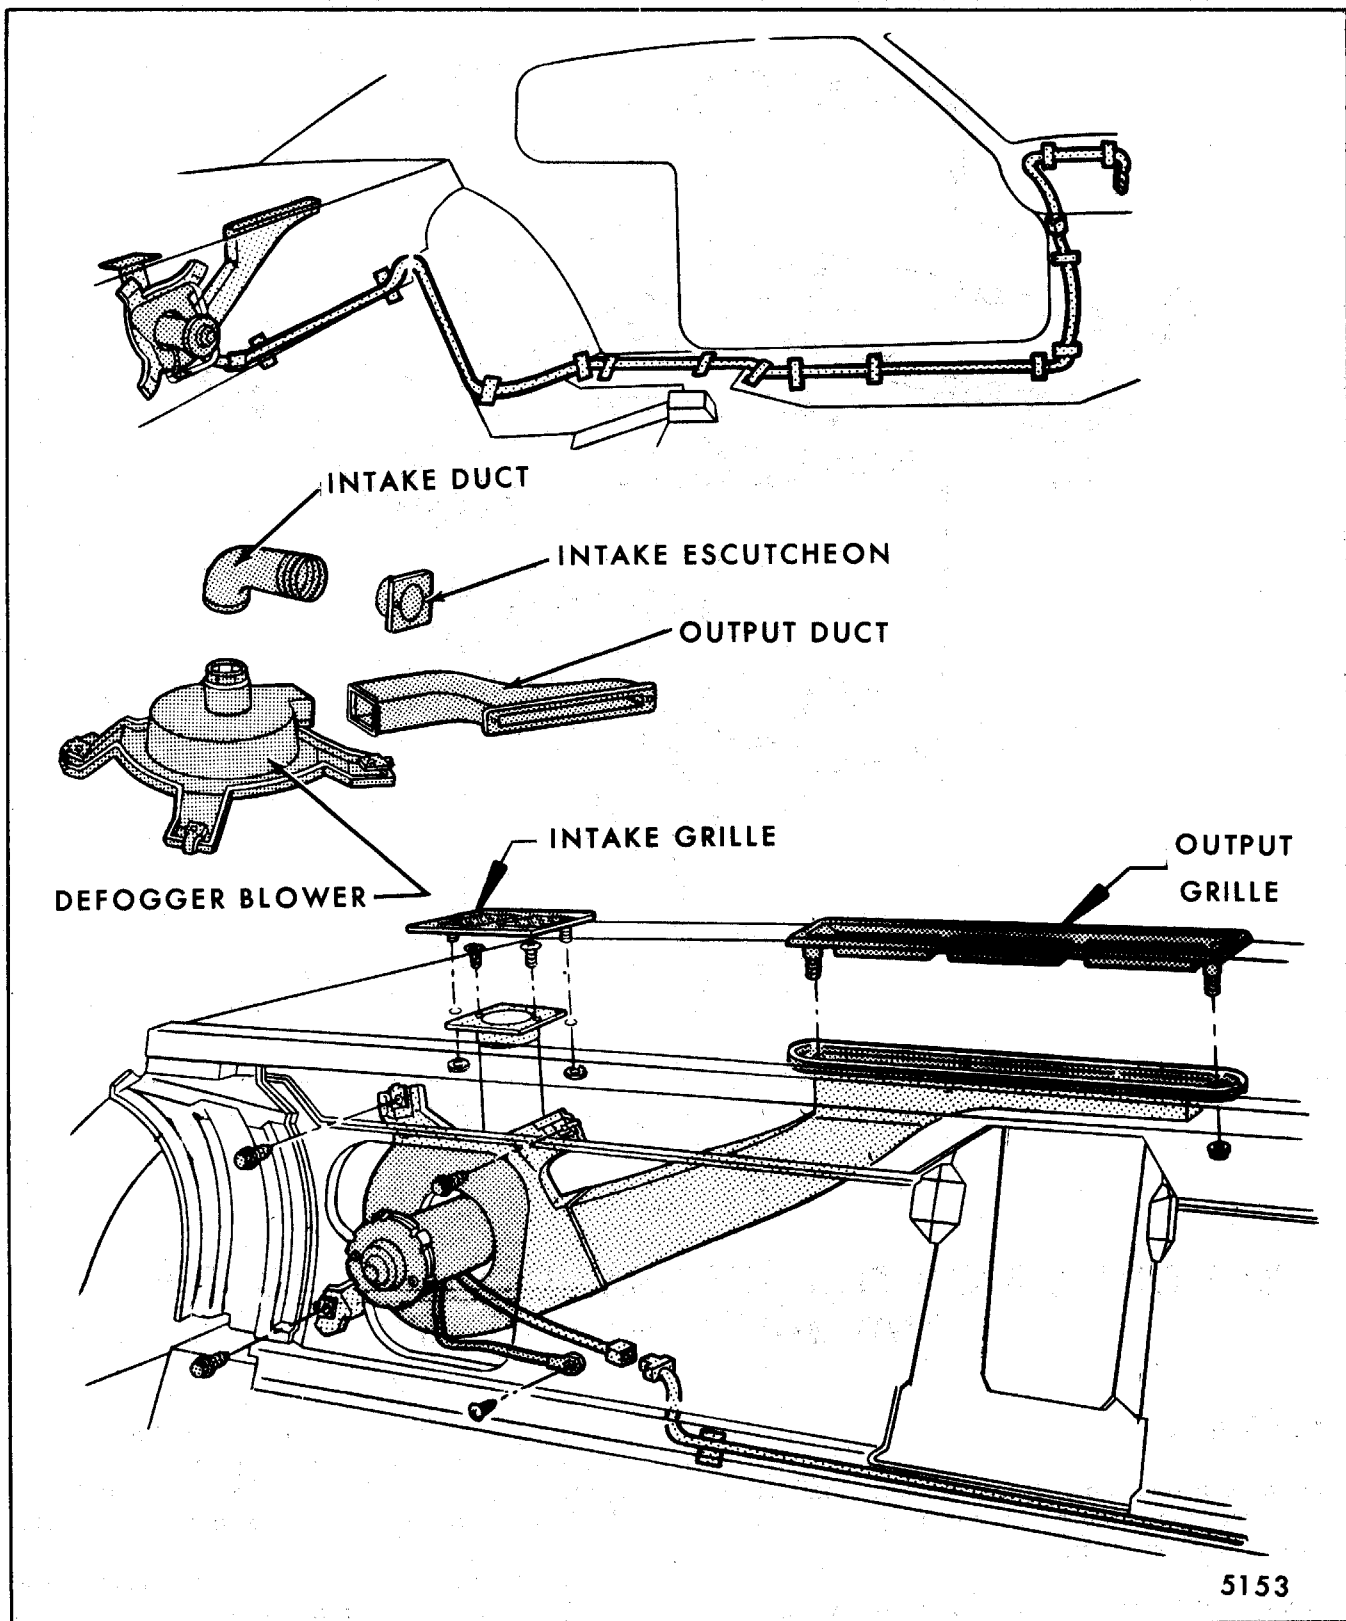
Defogger Blower Installation - Chevrolet "B-47" Style
